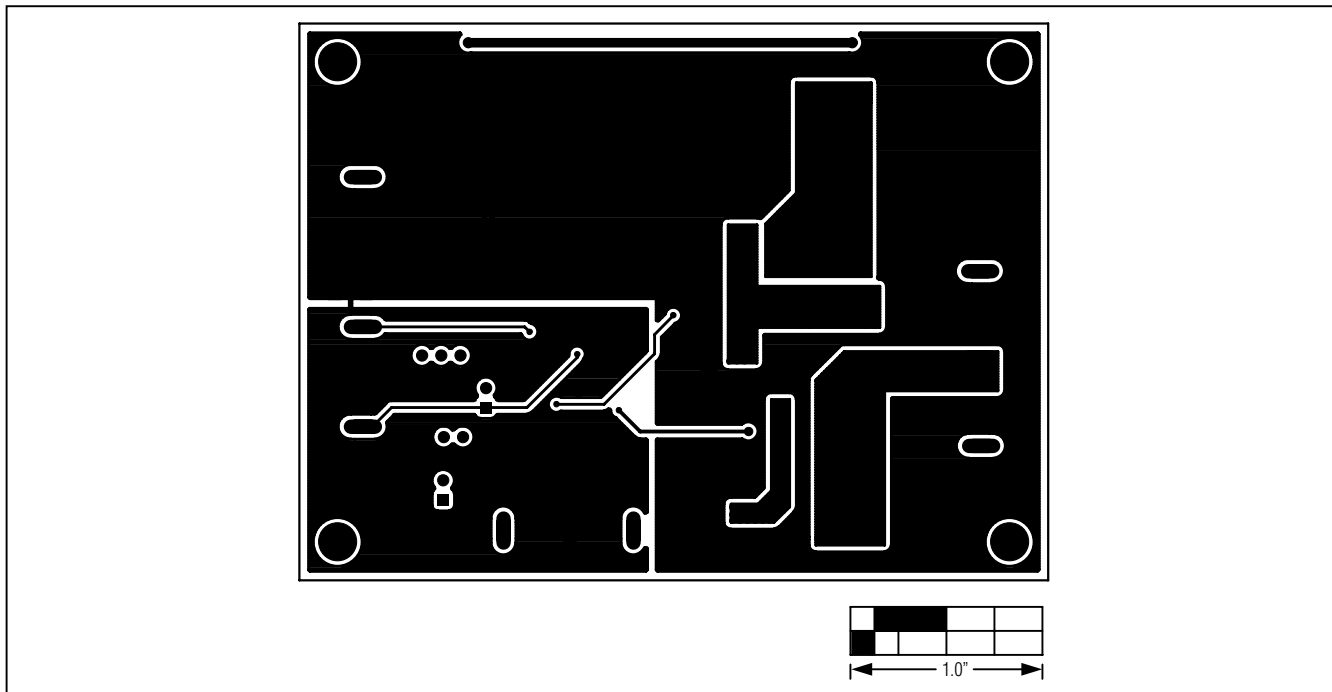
MAX16833 EV Kit PCB Layout—Solder Side
